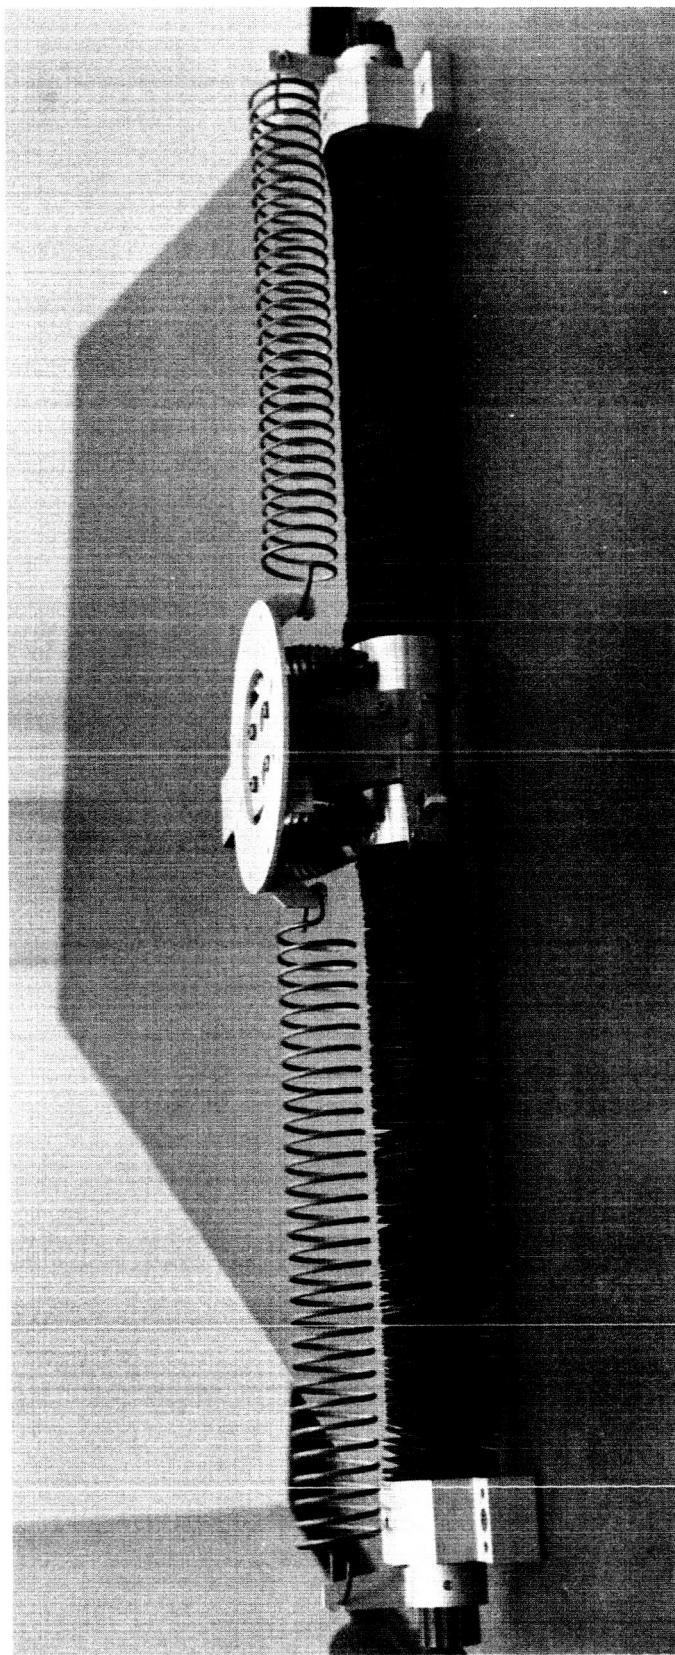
Saginaw Linear Ball Bearing Carriage Assembly
